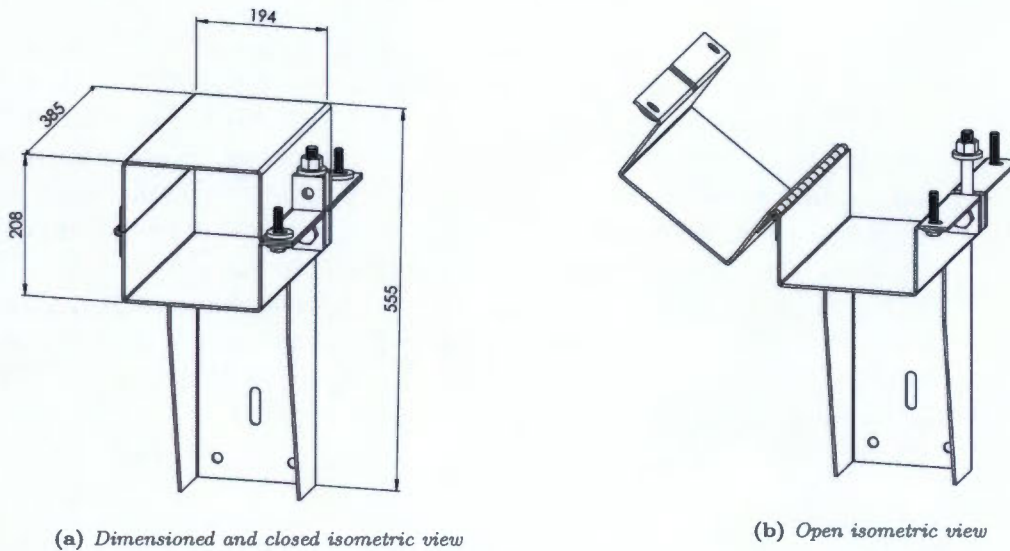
Three-dimensional representation of the shaft guard dimensioned and closed (a) and in the open position (b).
